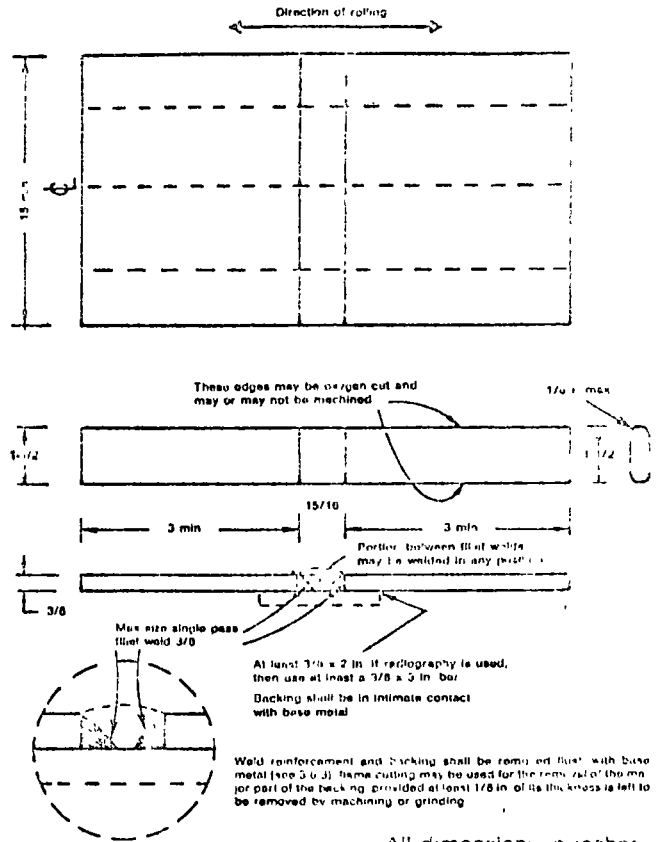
Fillet-weld root-bend test plate—welding operator qualification—option 2.
